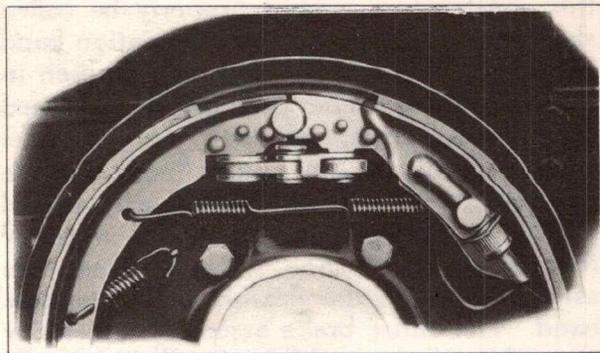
Showing $\frac{1}{32}$ Clearance between Brake Adjuster and Anchor Pin
